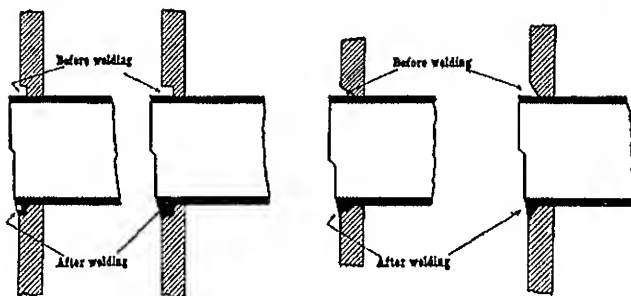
Method of Welding Boiler Tubes to Sheet.
